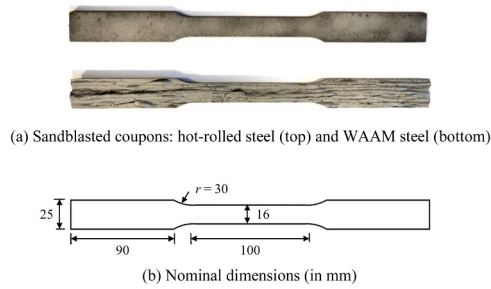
(a) Typical sandblasted hot-rolled steel and WAAM coupons and (b) coupon dimensions.
